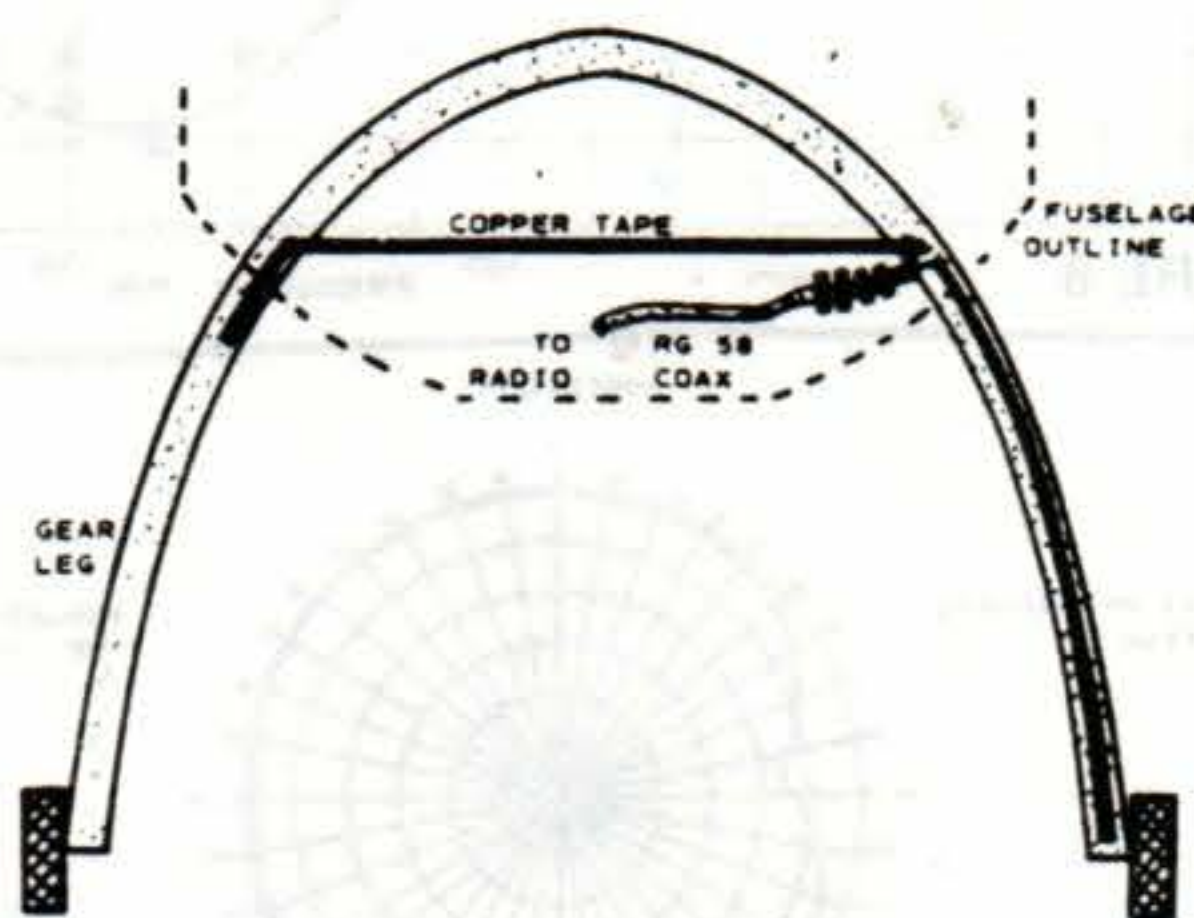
GEAR LEG COM ANTENNA INSTALLATION DRAWING
